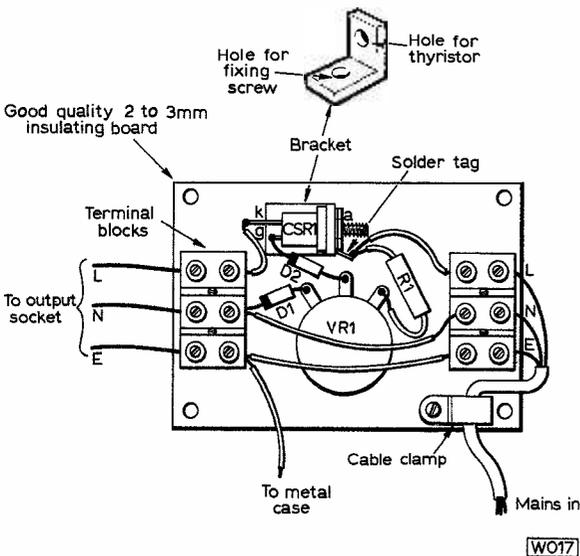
Layout of the components in the Motor Speed Controller. Note that the bracket holding the thyristor will be live.
